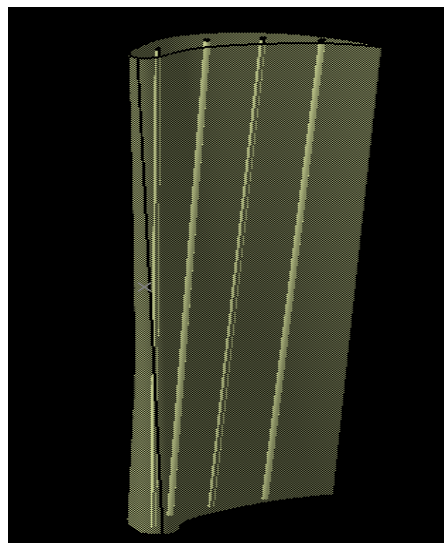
Inner view of multi-sectioned tube developed in CATIA
